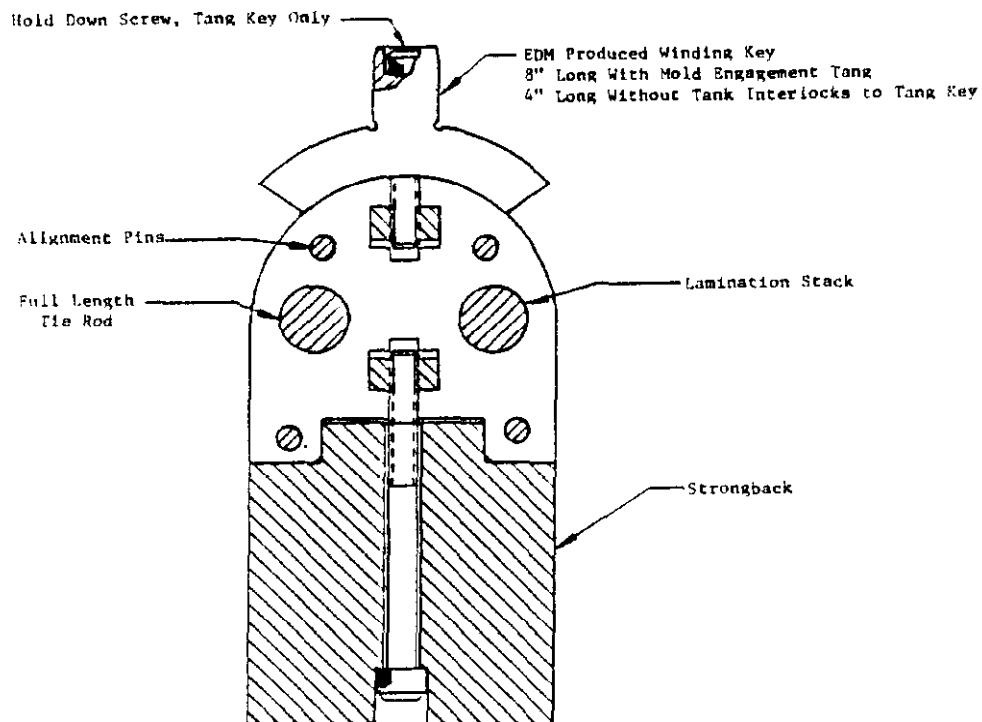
Outer Winding Mandrel and Winding Key Assembly - Length = 56'
